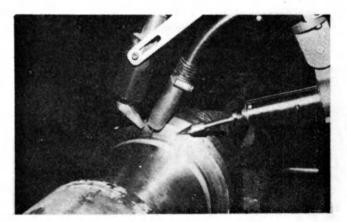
CONFIGURATION OF WELDING TORCH SEAM TRACKER AND ARC OSCILLATOR PROBES
